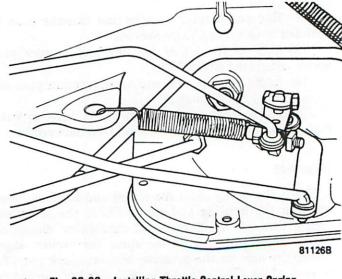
C-29 Installing Throttle Control Lever Spring— Six-Cylinder Engine
